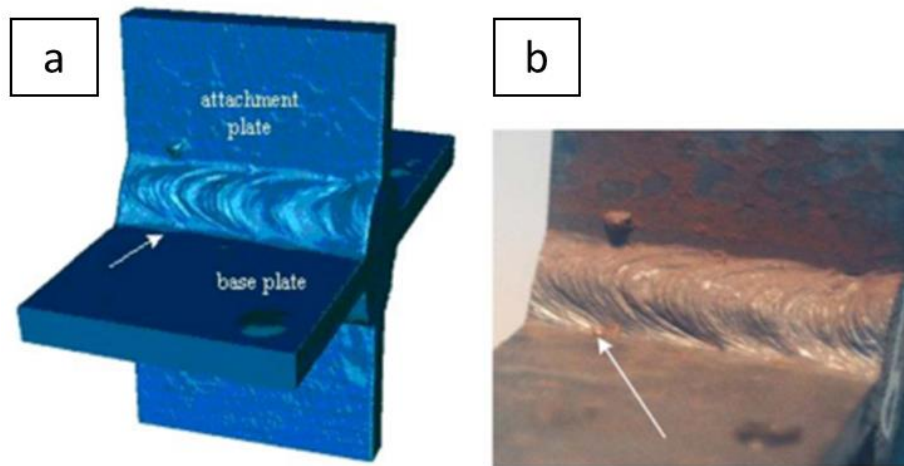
Image of the laser-scanning done by Hou [72] – a) 3D capture of the weld using laser scanning; b) image of the actual weld. Taken from [72].
